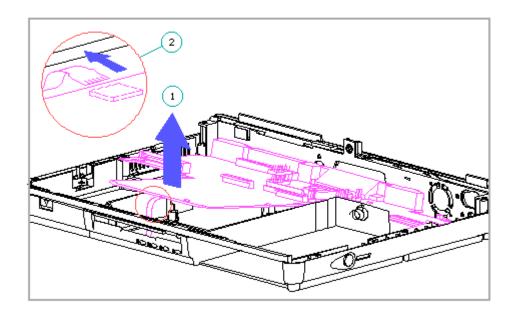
Disconnecting the LED Cable Assembly from the System Board
